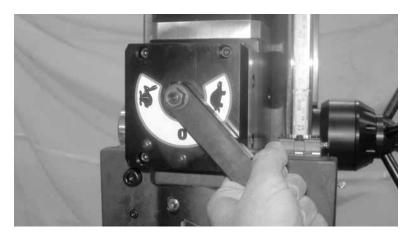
Set the speed select lever to slow for end milling. (Drills with two-speed gearbox only.)
